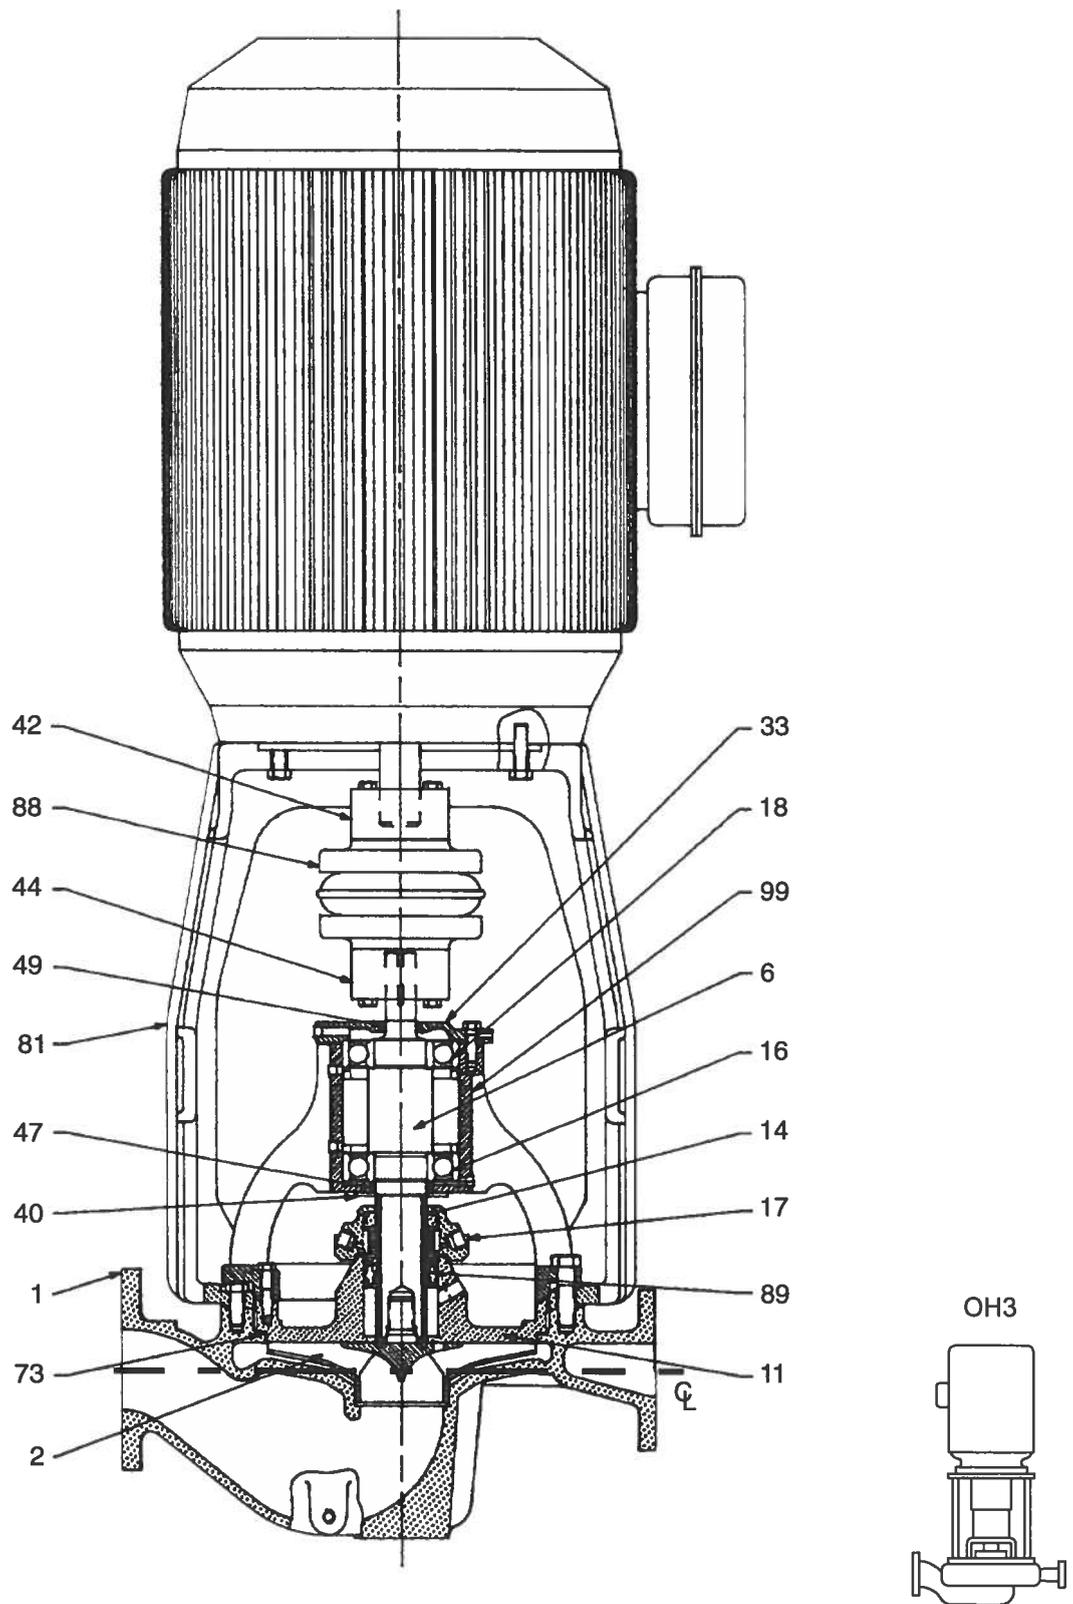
Overhung impeller – integral bearing frame – single stage – in-line – flexible coupling
